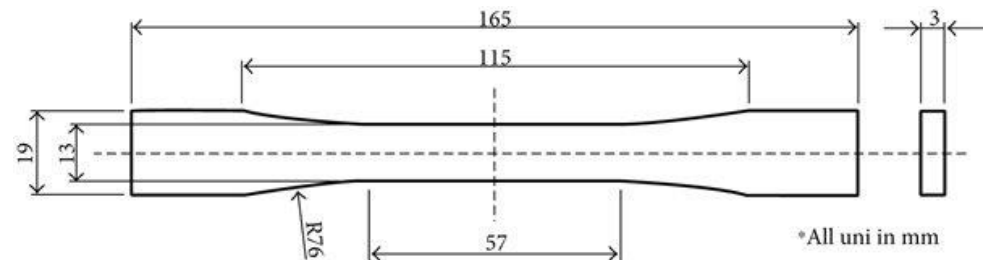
Dimensions of ASTM D 638 - 01 standard tensile test specimen
